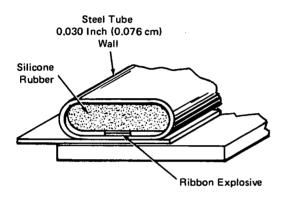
Setup for Explosive Weld to Confine Explosive Detonation Products
